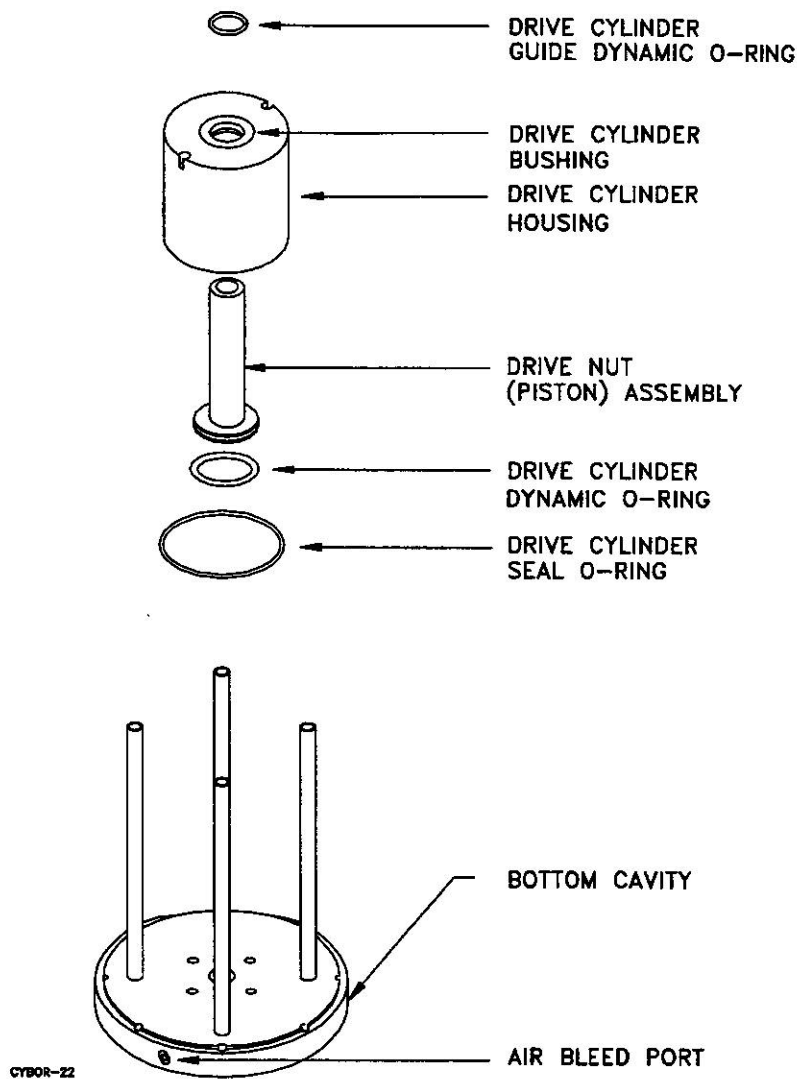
Drive Cylinder O-Rings Removal and Replacement (Sheet 2 of 2)
